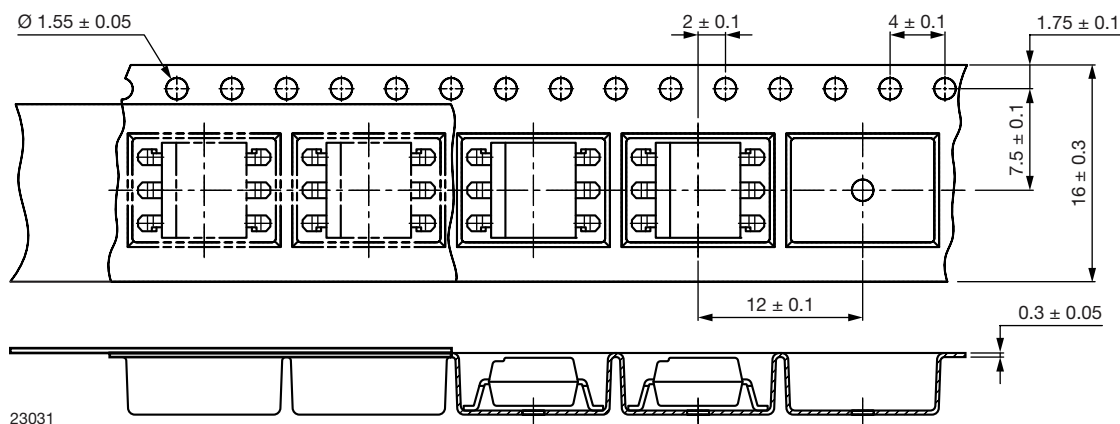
Tape and Reel Packaging (1000 pieces on reel)
